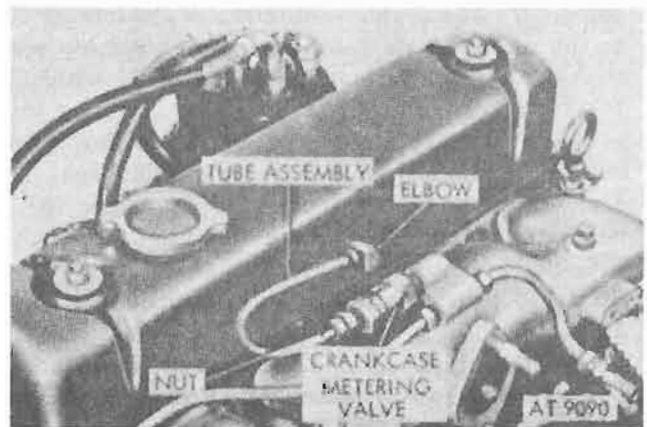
Crankcase ventilation outlet tube assembly and attaching parts.
